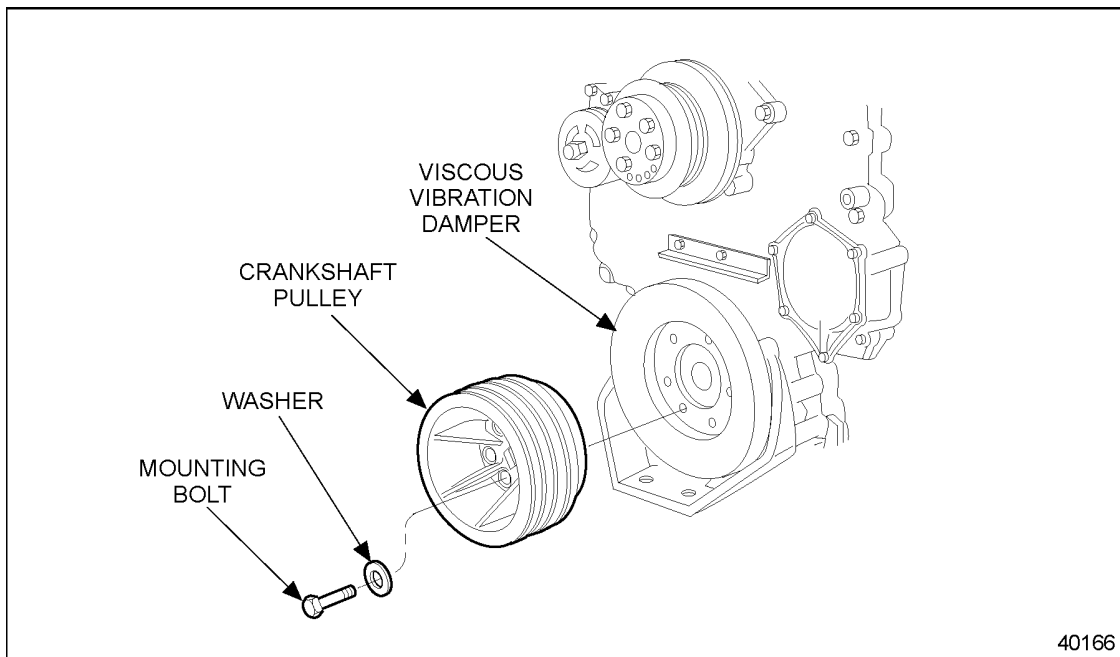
Crankshaft Pulley Mounted Directly to the Crankshaft
